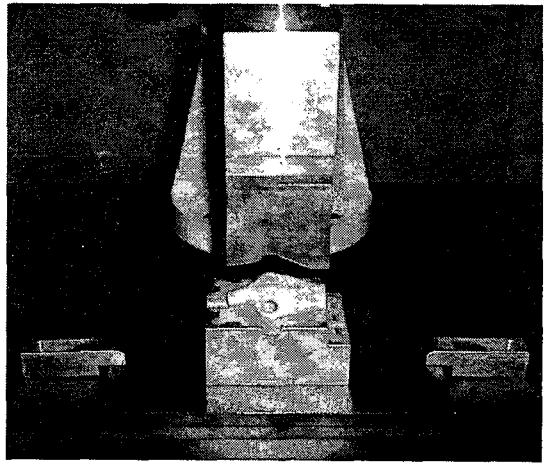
Ultrasonic welding of 3D thin-walled product
